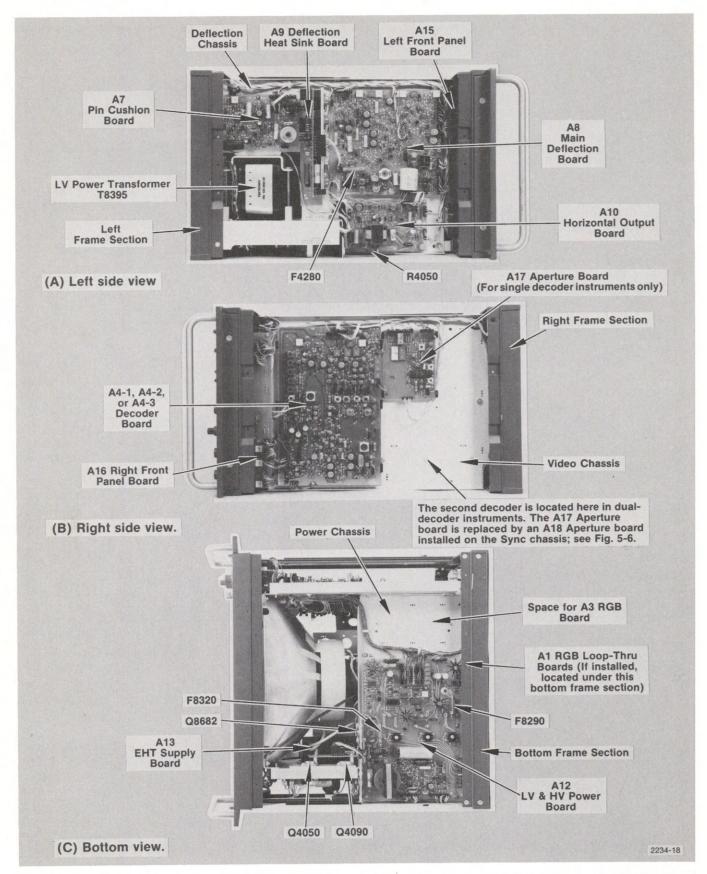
Left side, right side, and bottom views showing location of circuit boards and chassis-mounted components. Some mechanical parts are identified. Left and right frame sections have been removed to provide unobstructed views of left and right sides.
